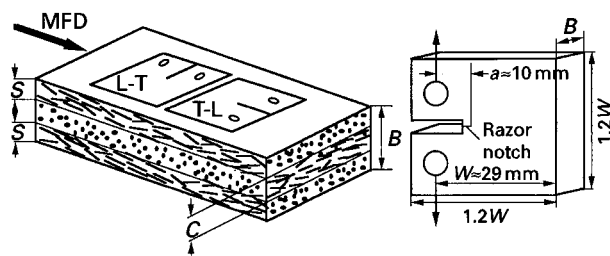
Machining and designation of the CT-specimens used along with a schematic of the fibre layering due to injection moulding.
